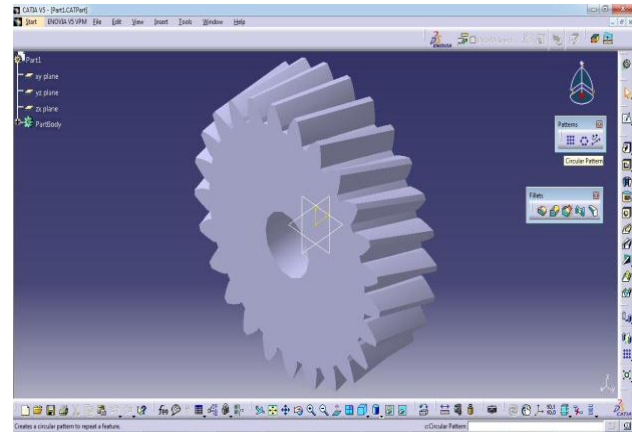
ISOMETRIC VIEW OF STANDARD HELICAL GEAR
